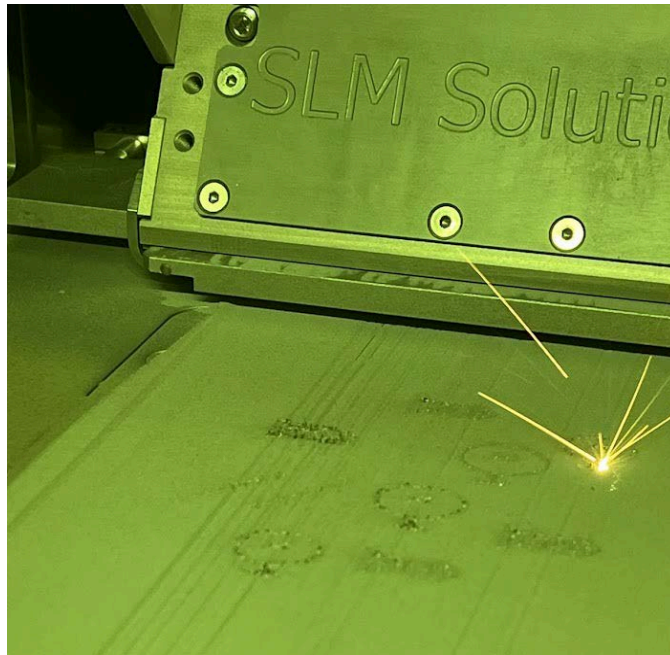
Image of the first few layers of build 3 in which the support structures in front of the welding coupons were overexposed due to an issue in preprocessing
